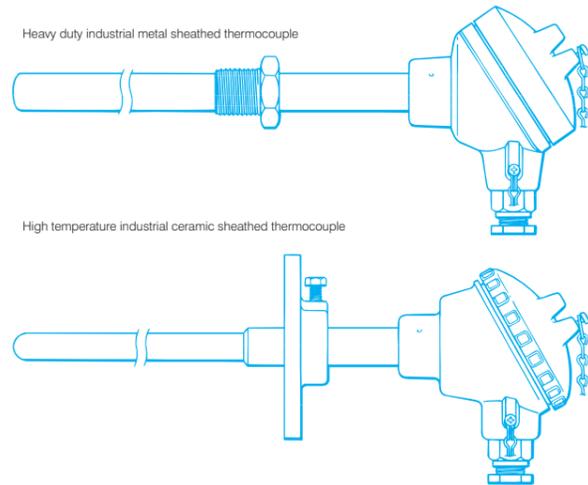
Heavy Duty Industrial Metal Sheathed and High Temperature Ceramic Sheathed Thermocouples with Terminal Head Assemblies
